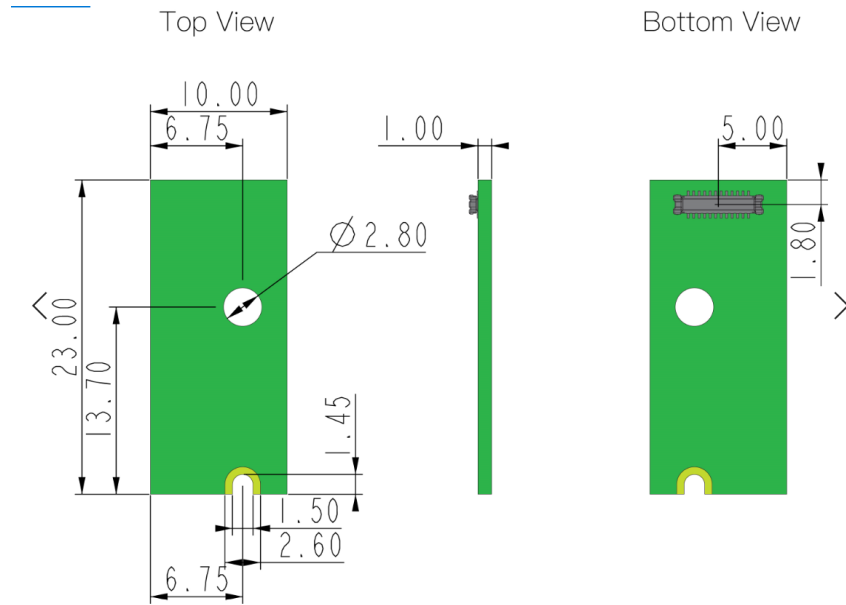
RAK1910 WisBlock GNSS Location Module Mechanic Drawing
